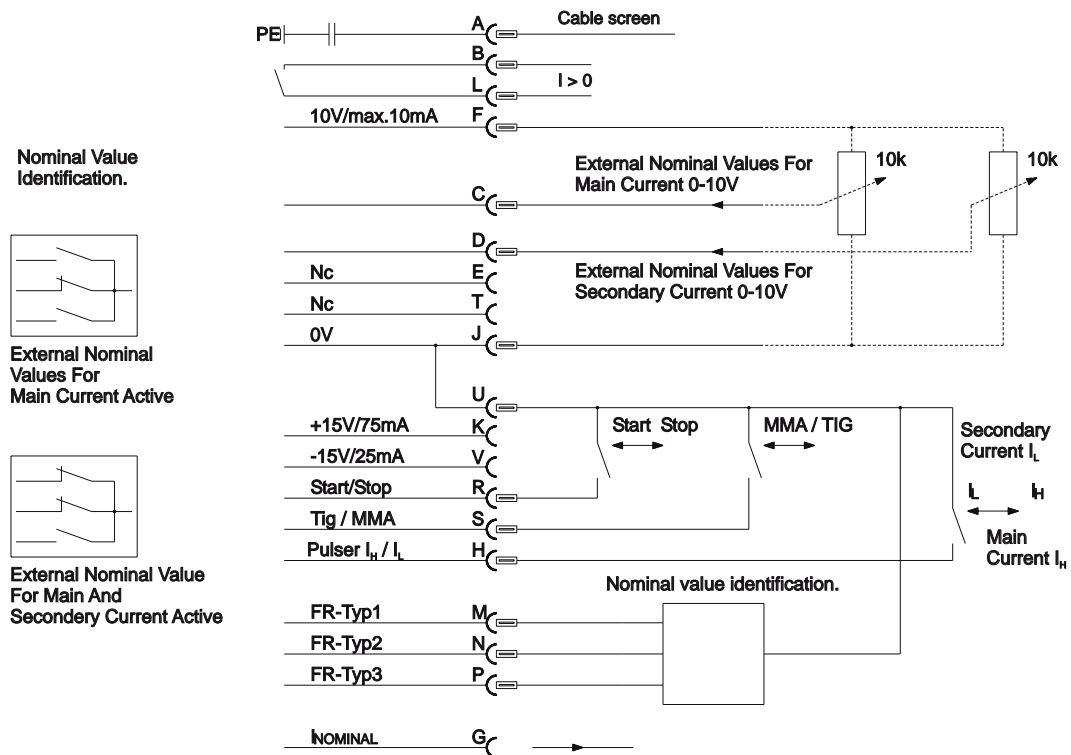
/8: Interface for mechanised welding, 19-pole
